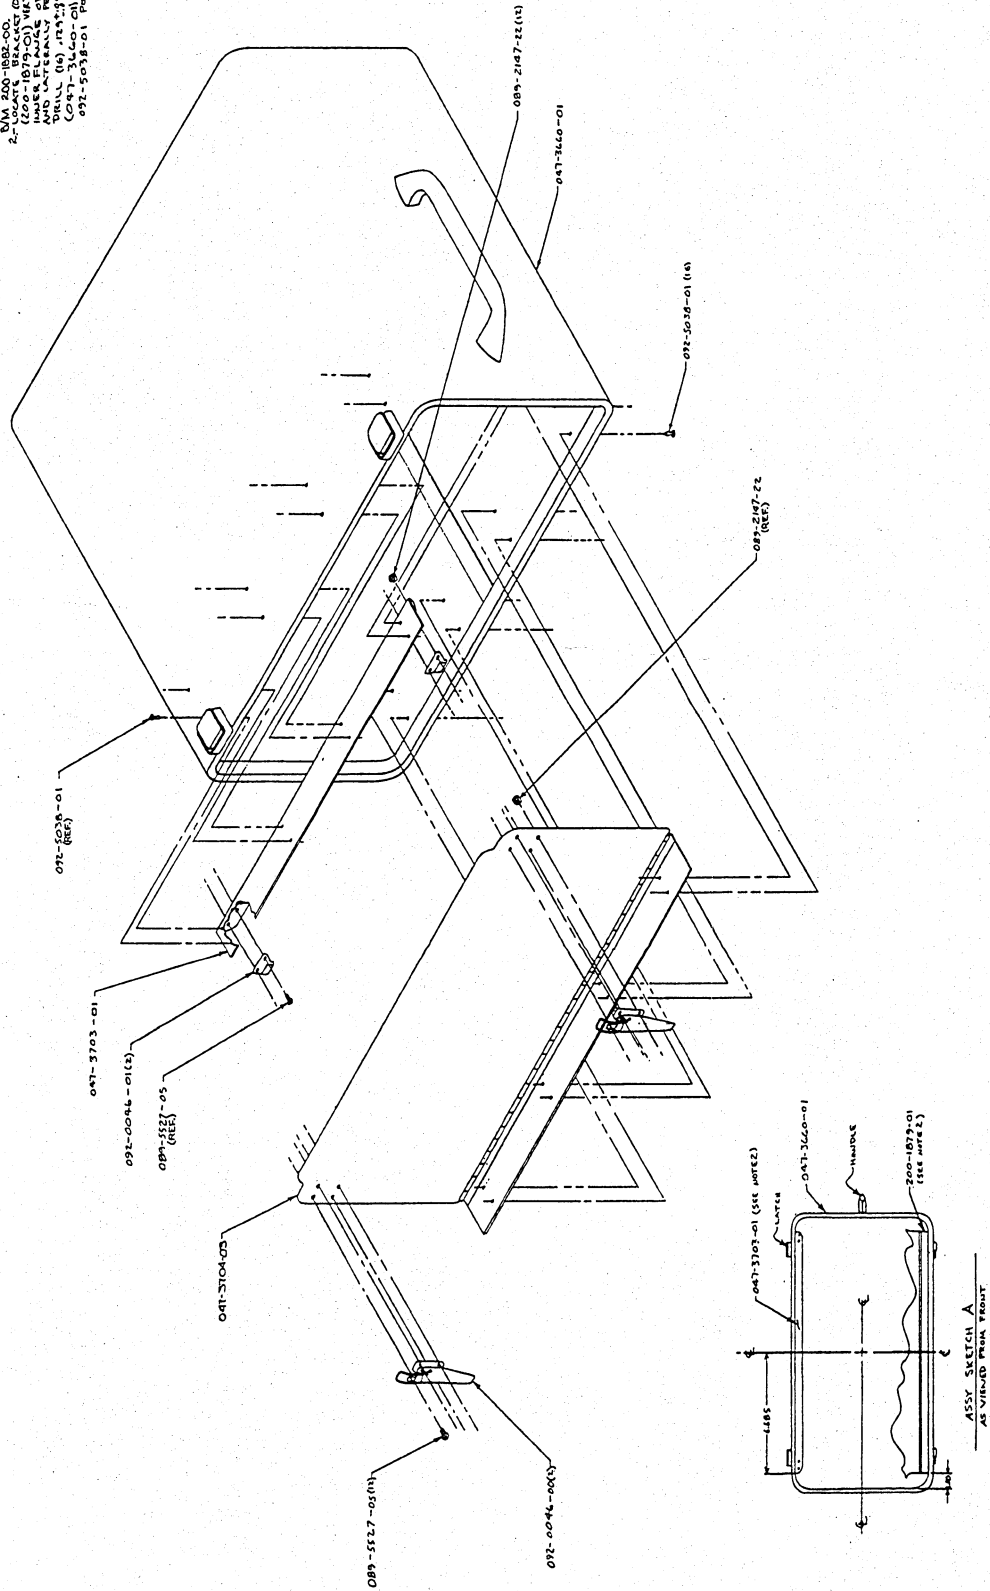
LOWER HALF CASE ASSEMBLY
